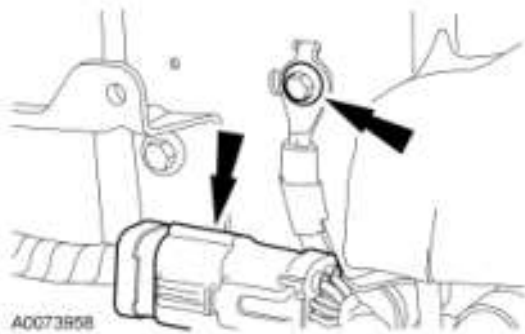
Detaching Wiring Harness And Windshield Washer Hose Retainers From Cowl Panel Extension
